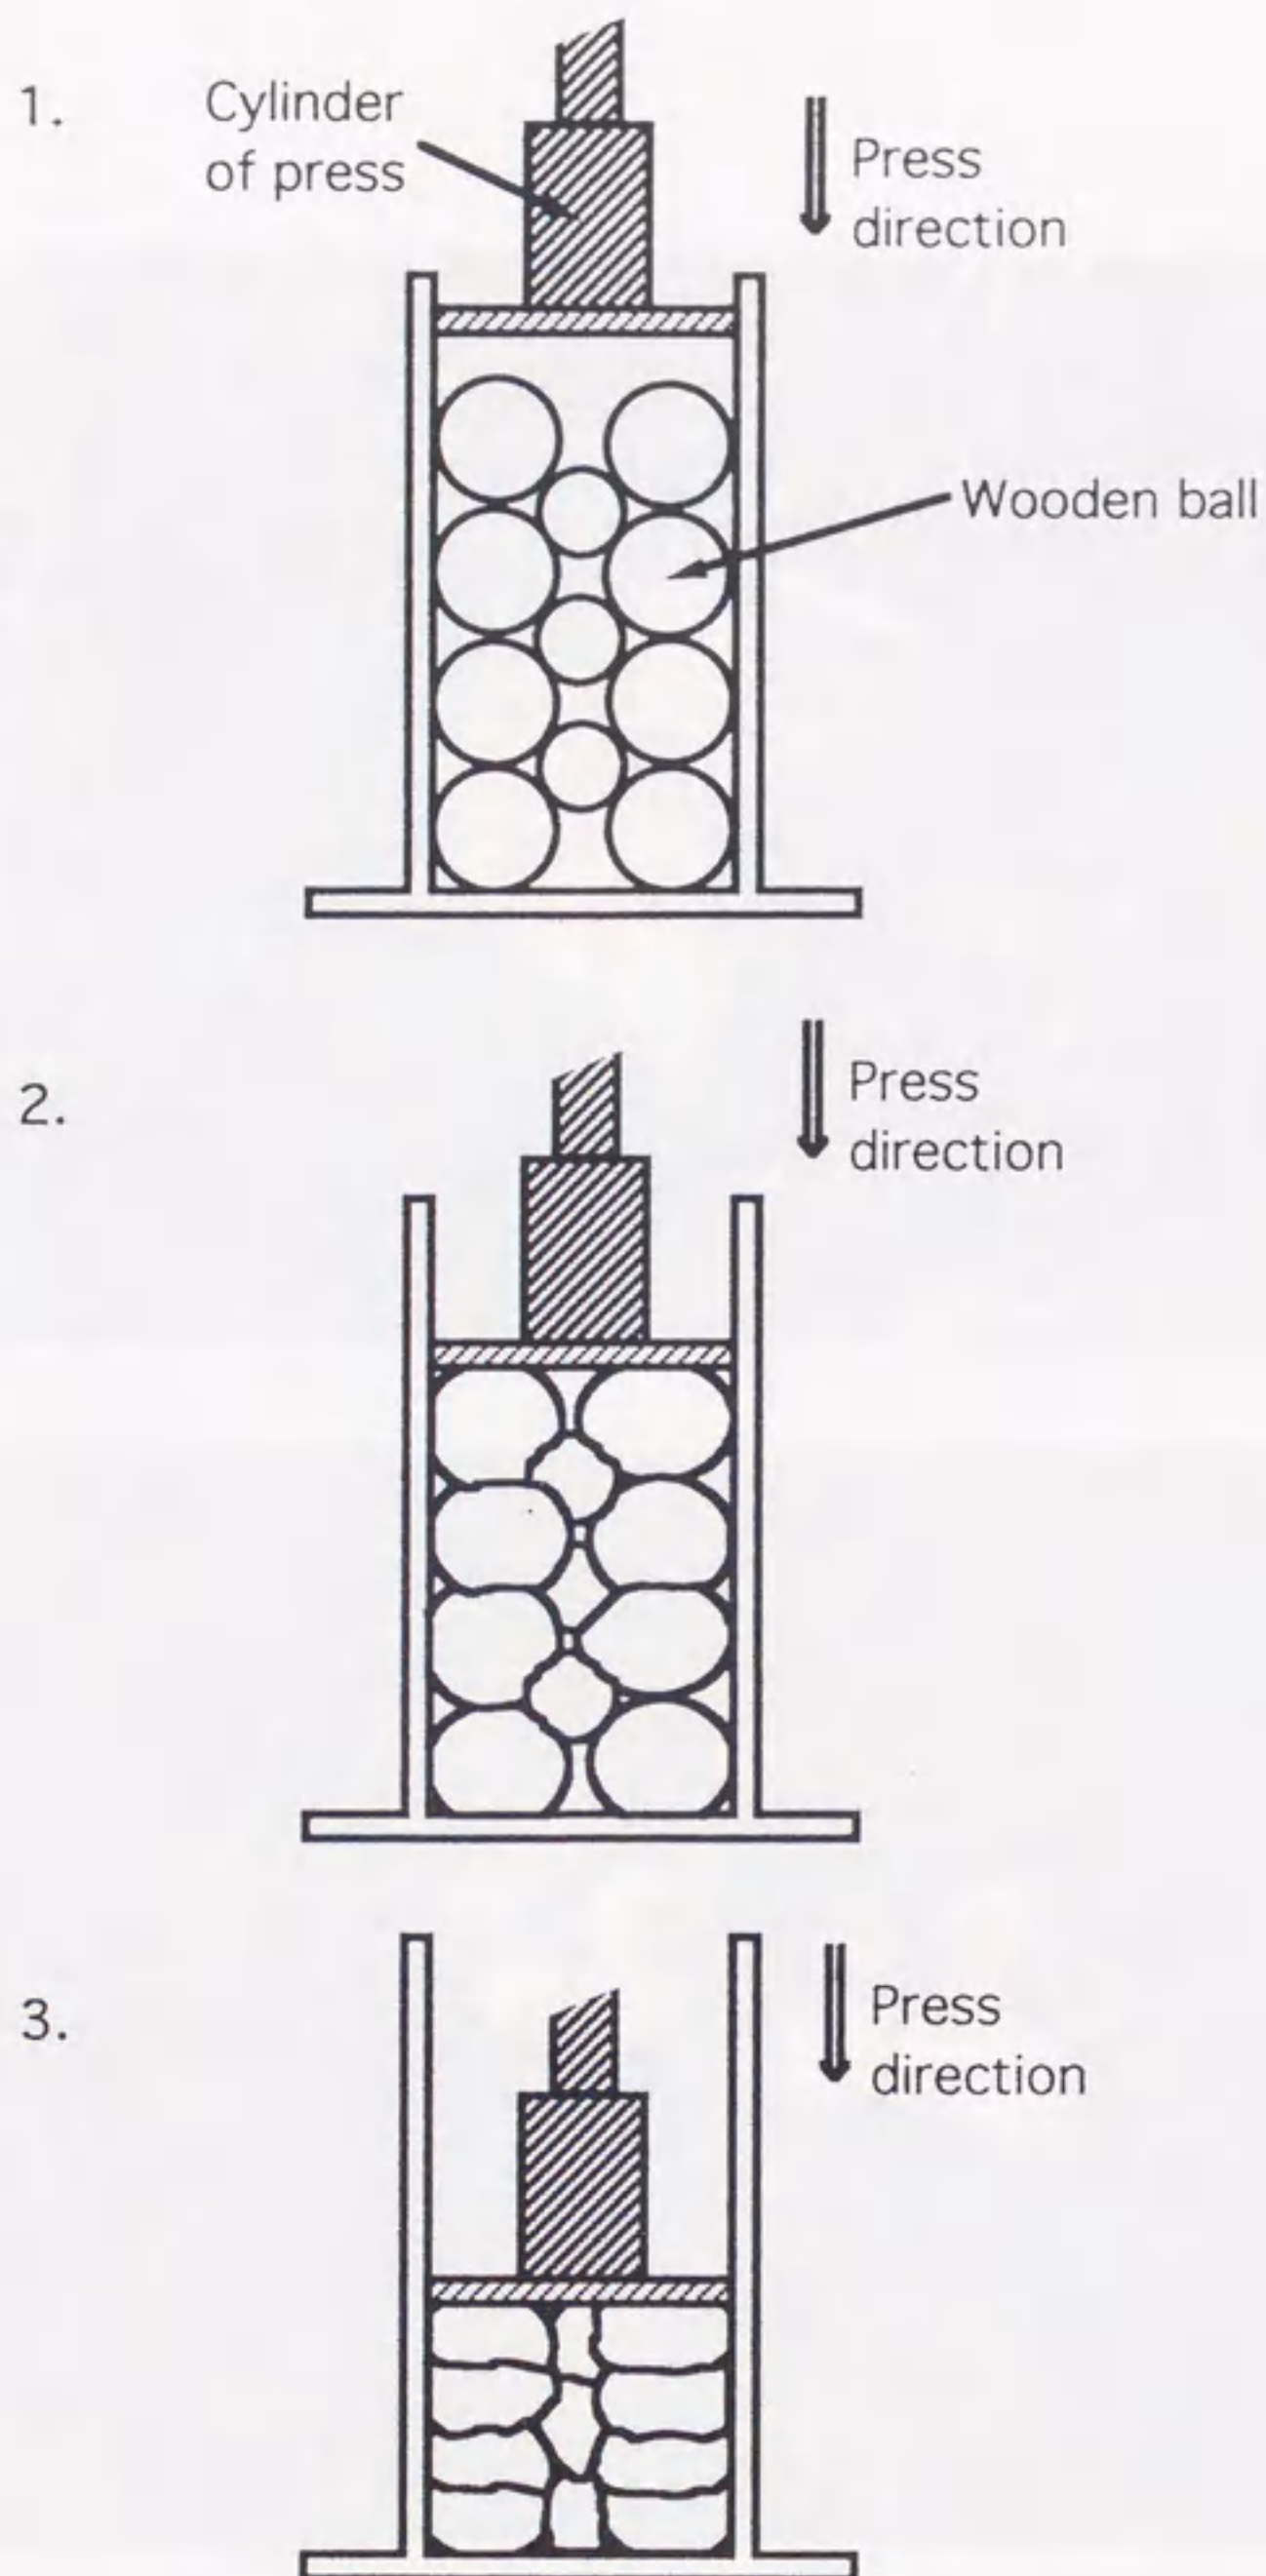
The manufacturing process of the laminated puzzle by compressive-molding under high temperature steam atmosphere.
